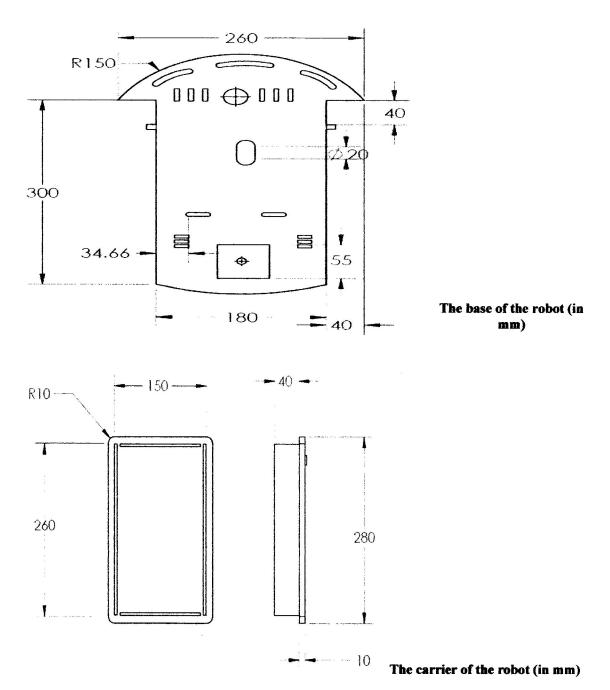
Dimensions of the Base and Carrier of the Robot
